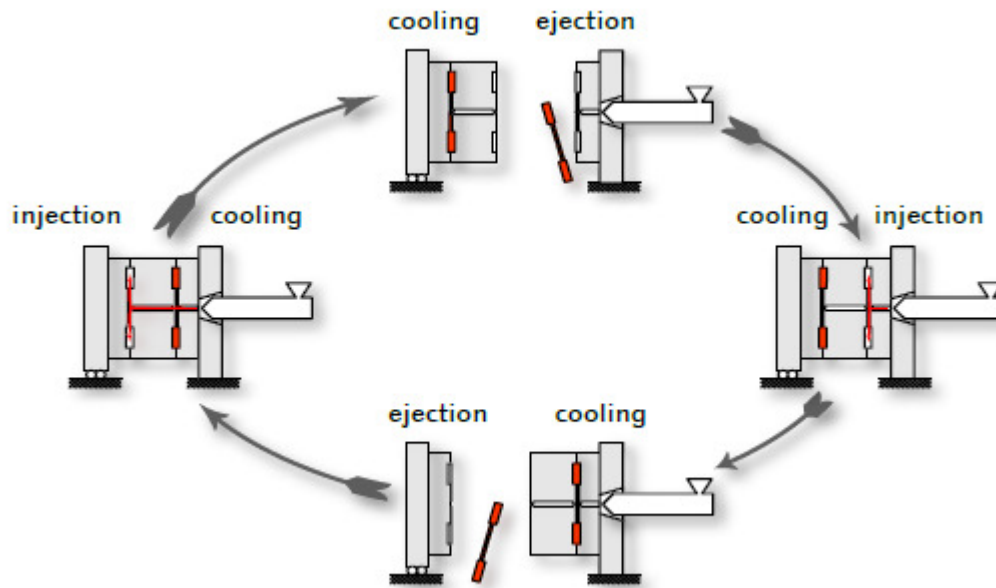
The operation cycle of a tandem mould (courtesy: T/mould Solution GmbH & Co. KG)
